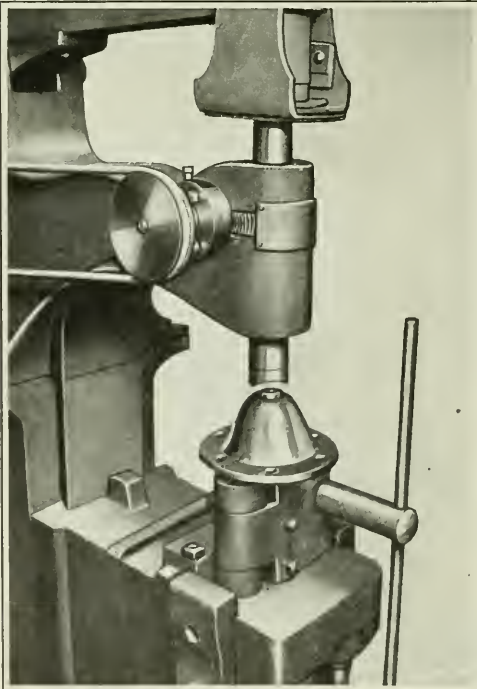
Set-up for riveting Rear Axle Drive Shafts over Hub Caps
